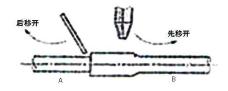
First remove the welding torch and then remove the electrode
